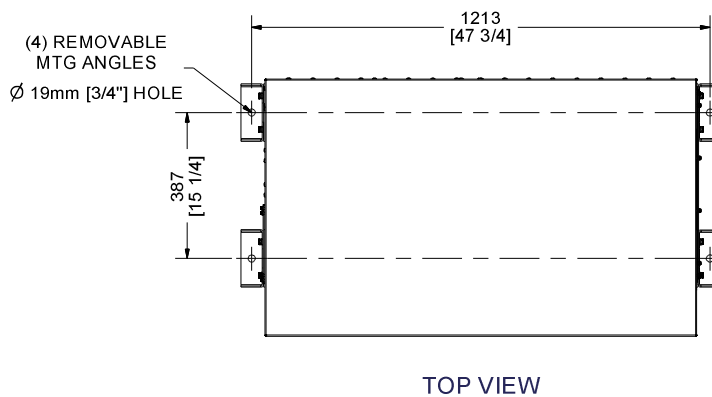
Enclosure Mounting Dimensions (PVS-50 Model)
